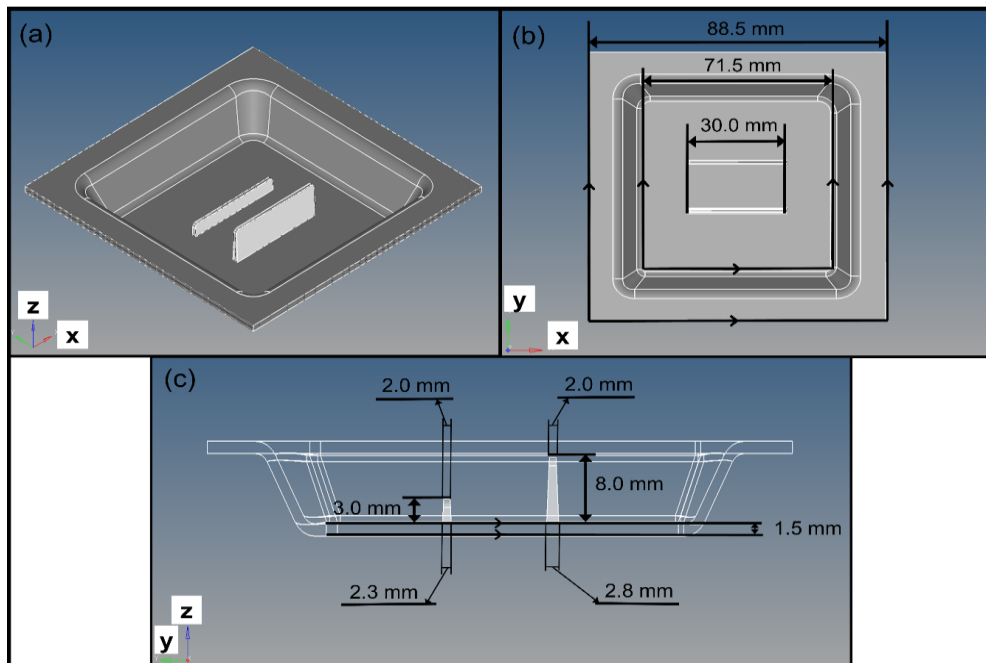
4. Schematics diagrams of the ribbed tray samples molded in this study. (a) 3-dimensional view, (b) top view and (c) dimensions of ribbed section.
